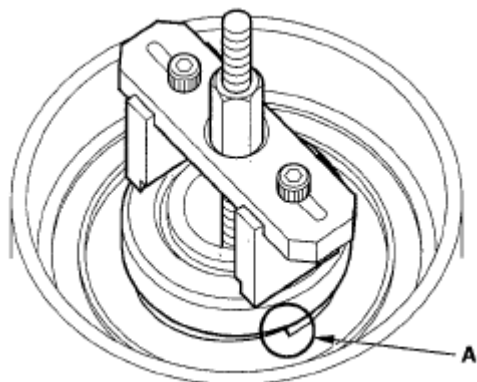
Identifying Clutch Spring Compressor And Clutch Return Spring End
